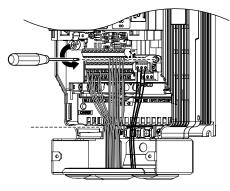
Unscrew the Terminal Board and Remove the Bottom Cover
